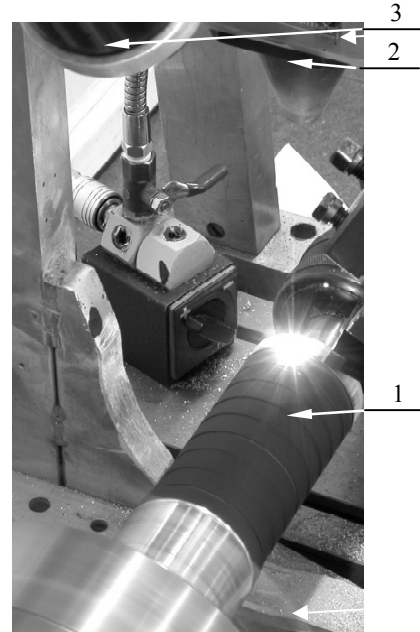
View of workstation: 1 - workpiece material, 2 - laser head, 3 - high-temperature pyrometer (measurement temperature in heating zone by laser beam)
